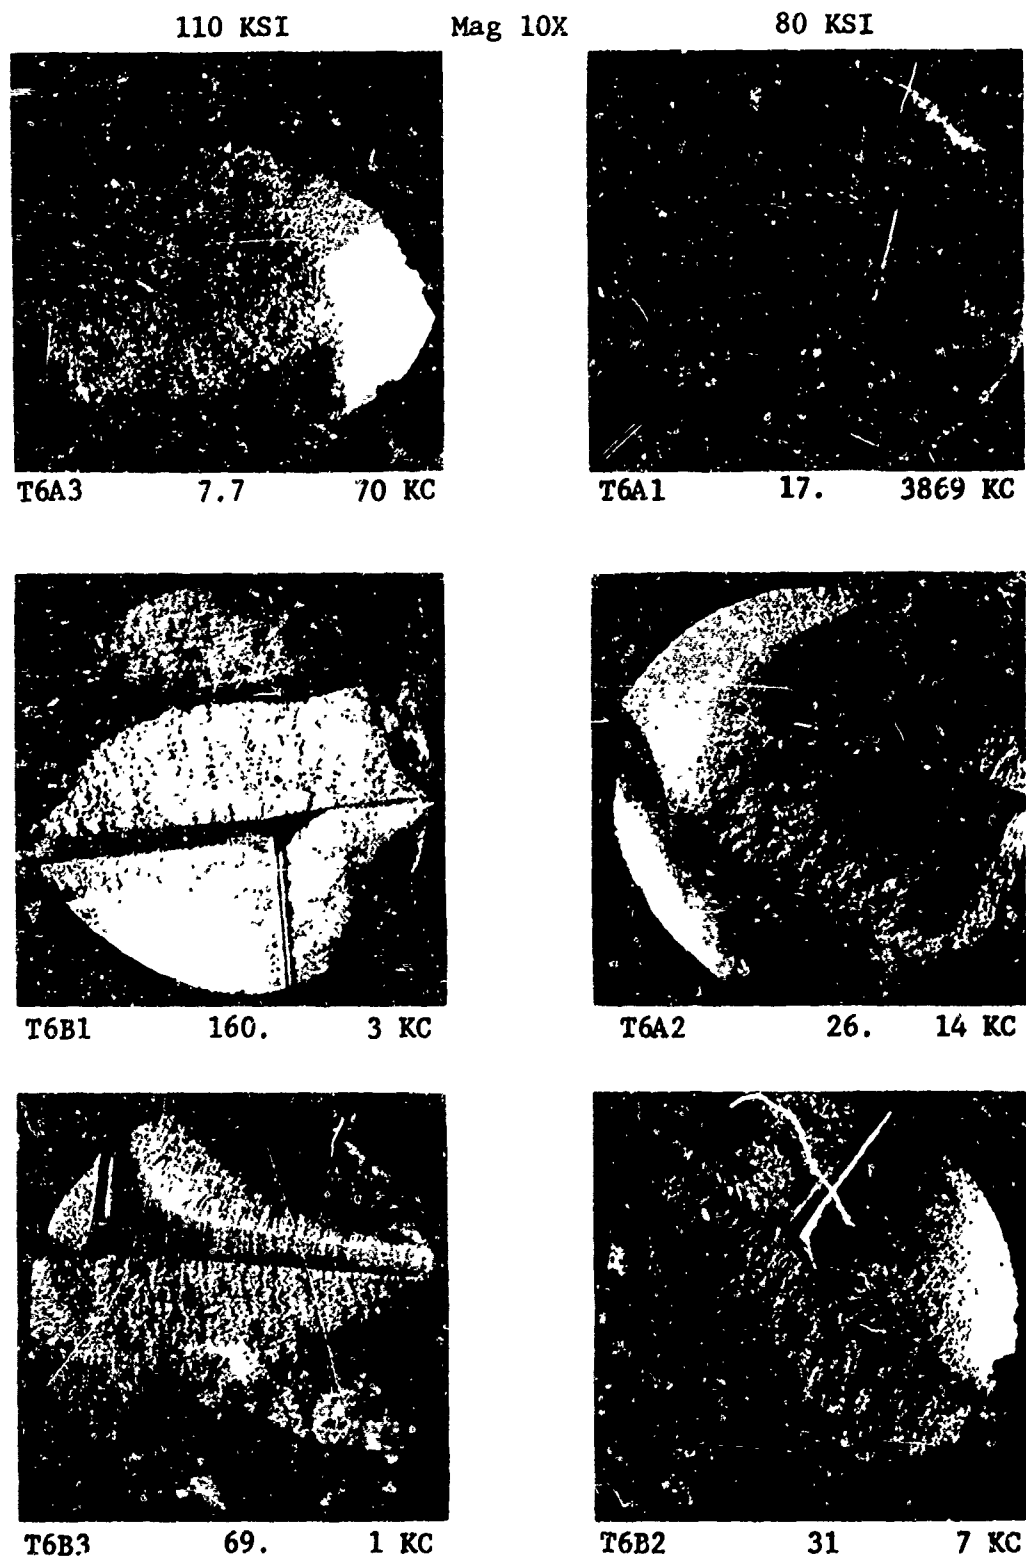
Fracture Surfaces of Failed Fatigue Specimens Series T6-Multiple-Bond/3-Axis Diffusion Bonded with .018" Tetragonal Corner Void
